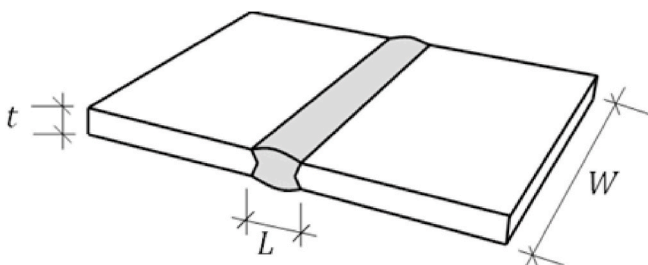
Global weld geometry of the double-sided butt welds between plates.
